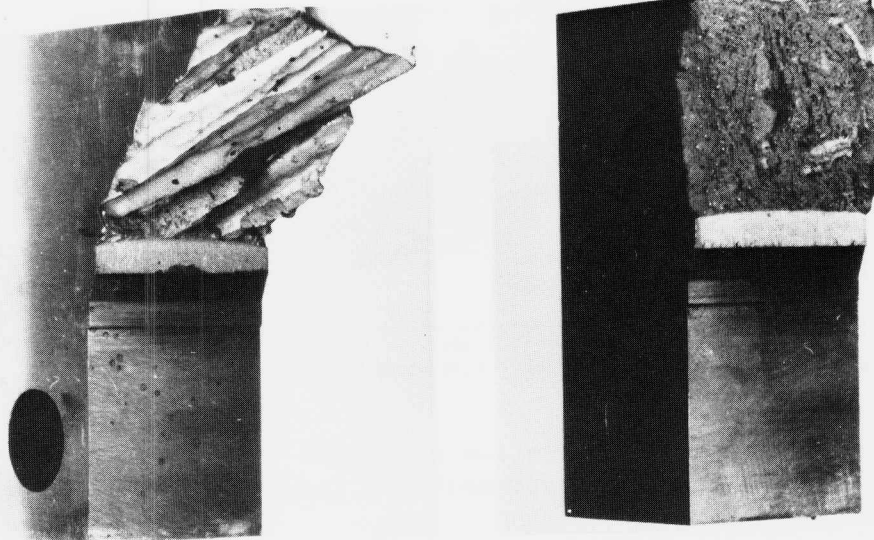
Typical fracture surfaces of K_{1c} test pieces of as cast ESR steel.
